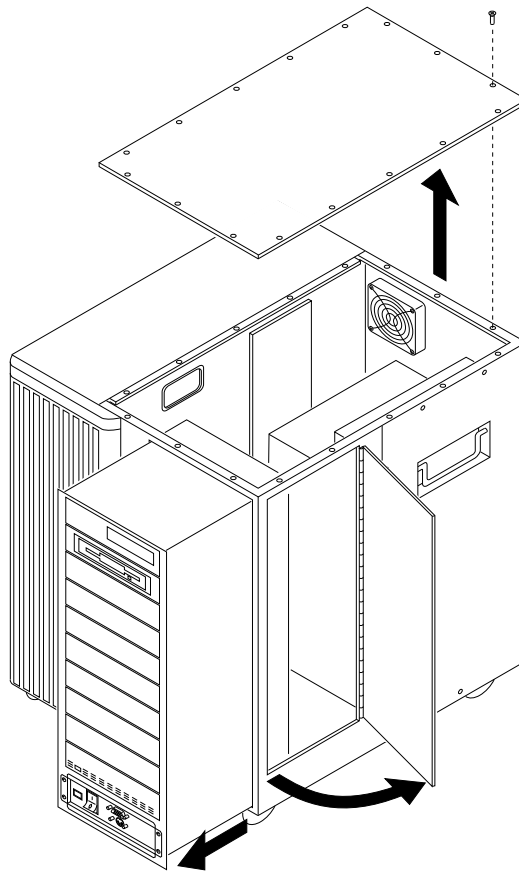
Front View of MAP/100 with Doors and Desk Side Panels Removed
